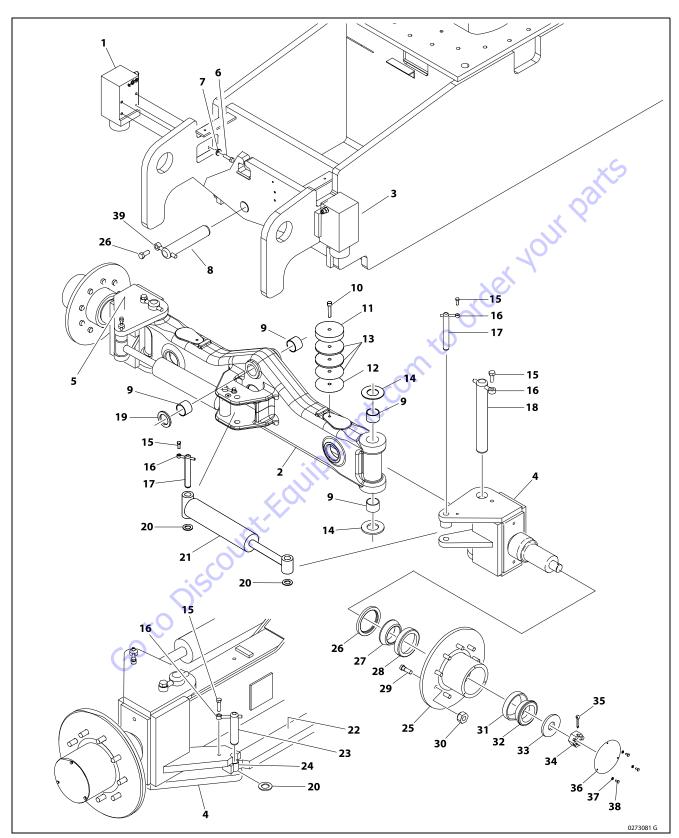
Front Axle And Steering Installations - Without Tow Package (2WD) - Sheet 1 of 2
